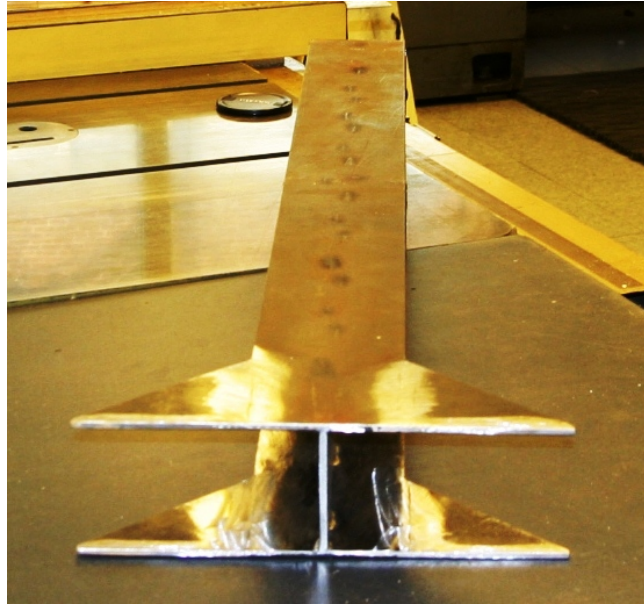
A Welded I-Beam before Being Welded to the Box Beam
